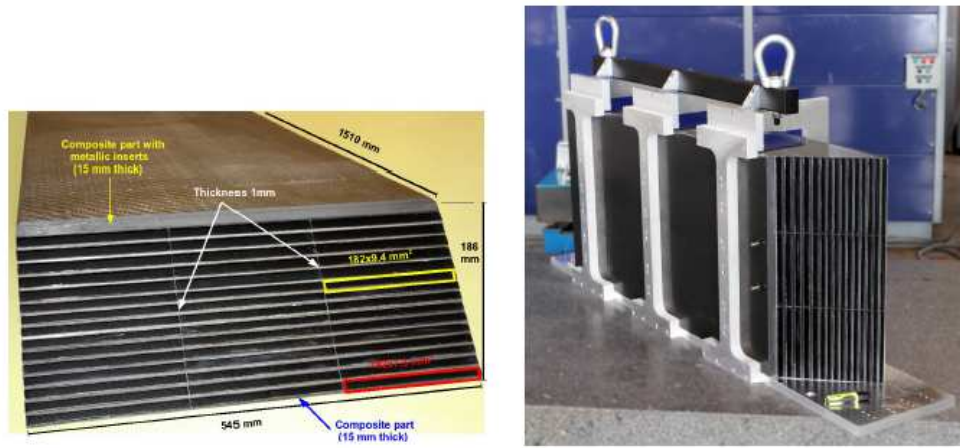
Left: Front view with dimensions of the alveolar structure which houses the sensitive layers of the SiW-ECAL prototype. Right: Side view of the completed structure and its mechanical protection [43].
